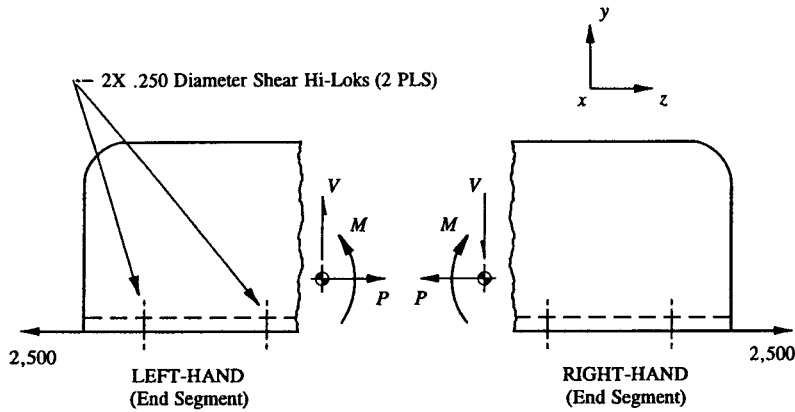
System of internal forces shown on exposed sections of the beam.
